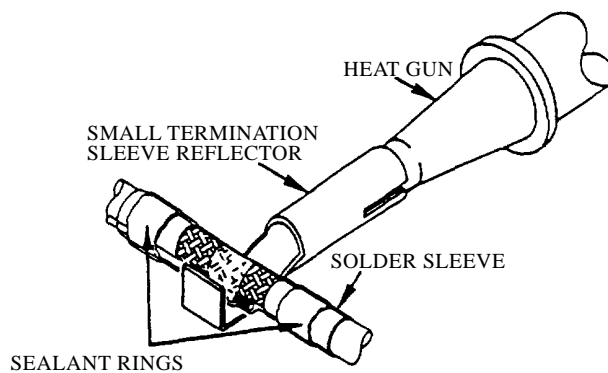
Immersion Resistant and Standard Solder Sleeve Installation (Sheet 2)
